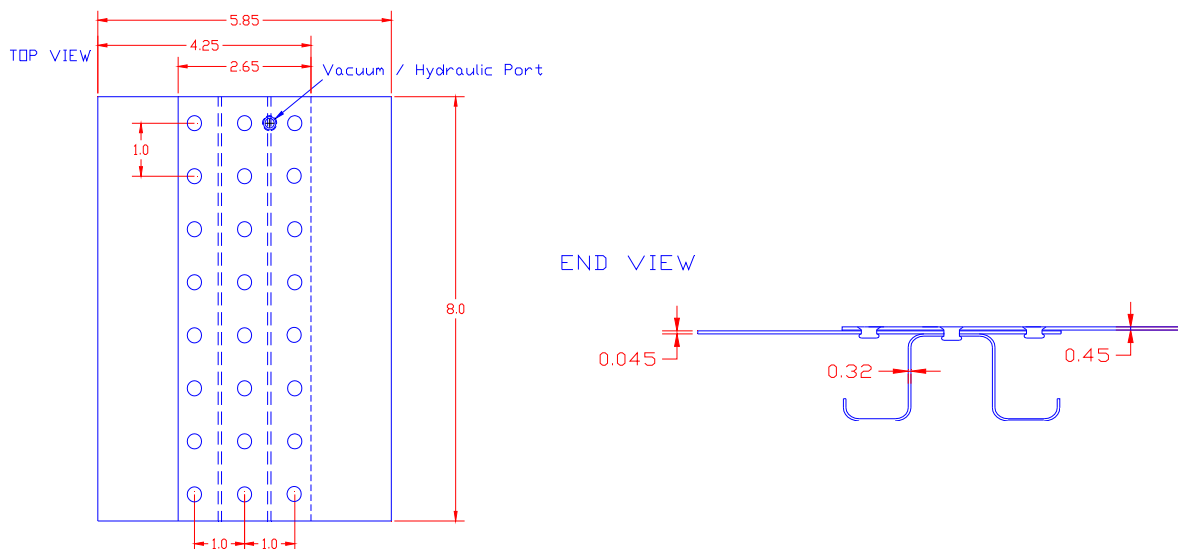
Sketch of Lap-Joint with Hydraulic Pillowing Bladder.
